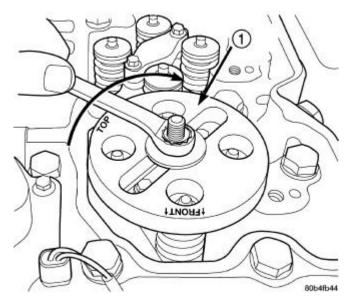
Compressing Valve Springs With Tool 8319 Courtesy of CHRYSLER GROUP, LLC
